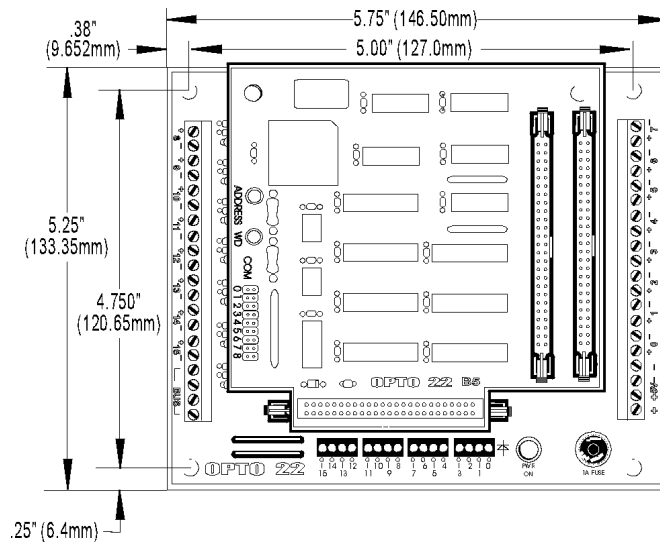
Mounting Dimensions of the G4PB16J/K/L with a B5 Installed
